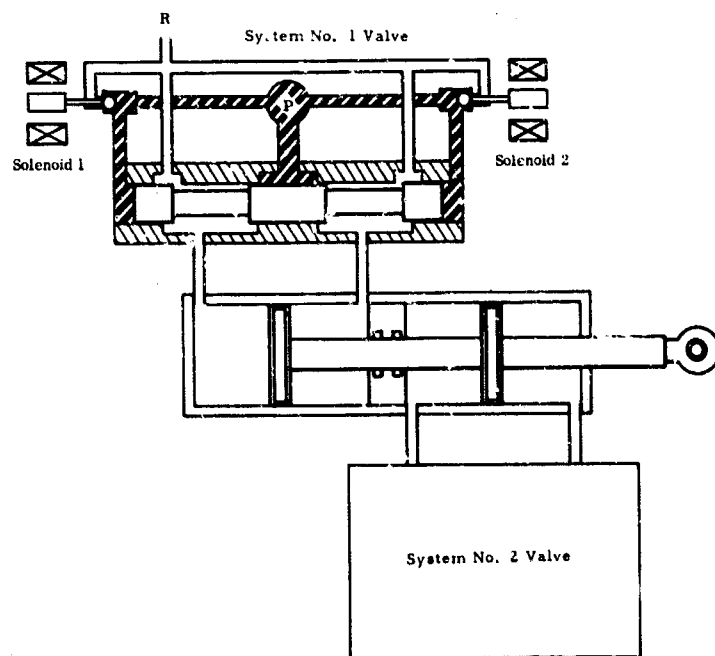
Hydraulic System, Three-Position, Four-Way Control Valve Schematic.
